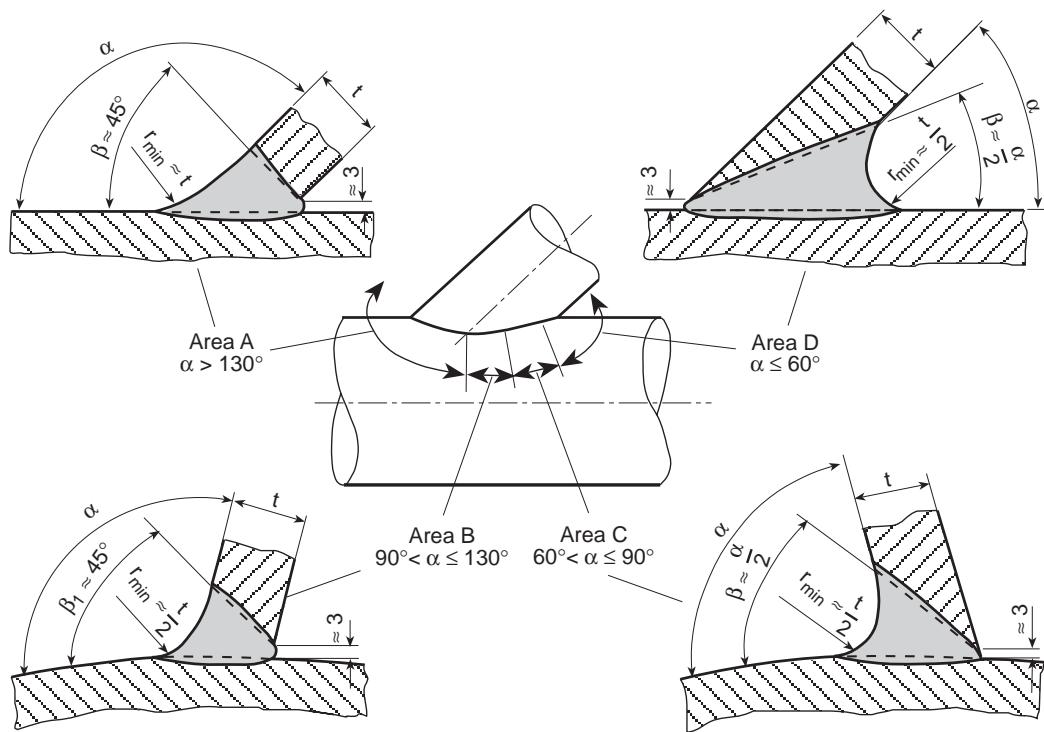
Typical tubular weld connections without back welding
